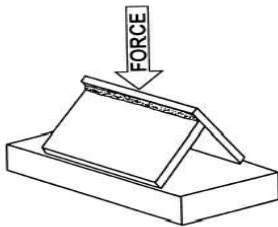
Rupturing Fillet Weld Test Plate
